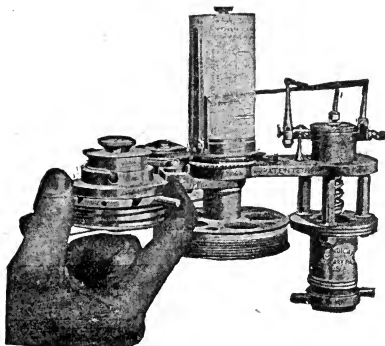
,532.—Adjusting the tension of the Trill indicator recoil spring. *In construction*, a disc is placed on the same shaft with the nest of bushings and wheel enclosing the recoil spring. On the edge of the disc are notches for the reception of a pencil located under the frame arm. The inner end of the recoil spring is fastened to the disc, so that by turning the latter, as shown, the pull of the recoil spring is increased to any desired tension, and by removing the panel and letting the spring unwind, the opposite result is obtained.
